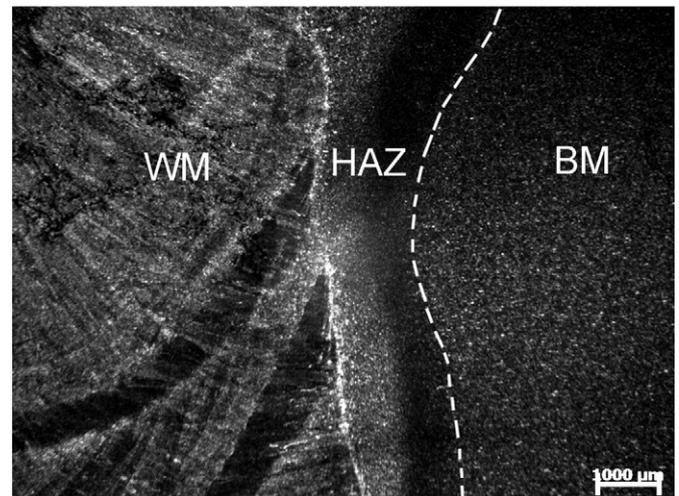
Partial outline of welded joint with heat input of 1.43 kJ/mm.
